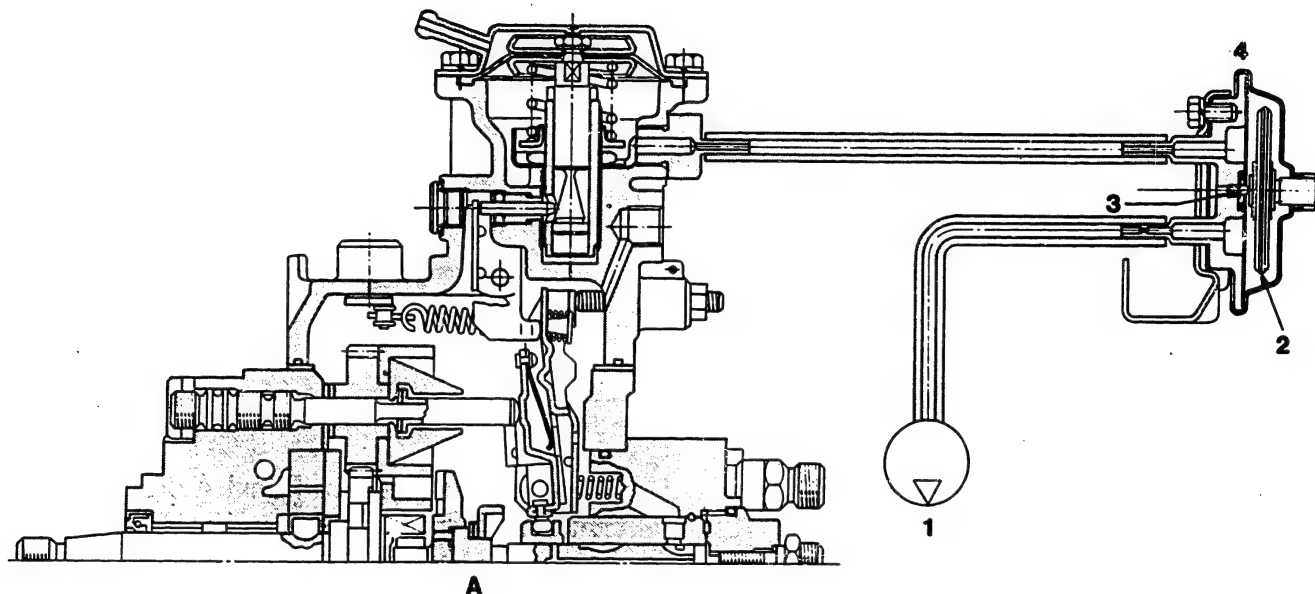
Cross-sectional view of the A.B.C.S. and vacuum regulator
